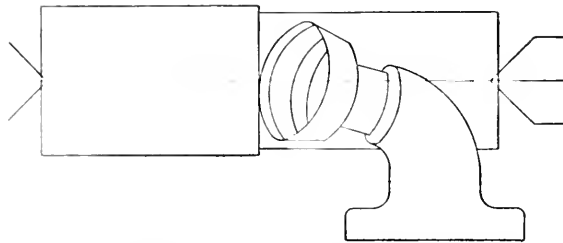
ROTARY TOOL MACHINING SHOULDER
